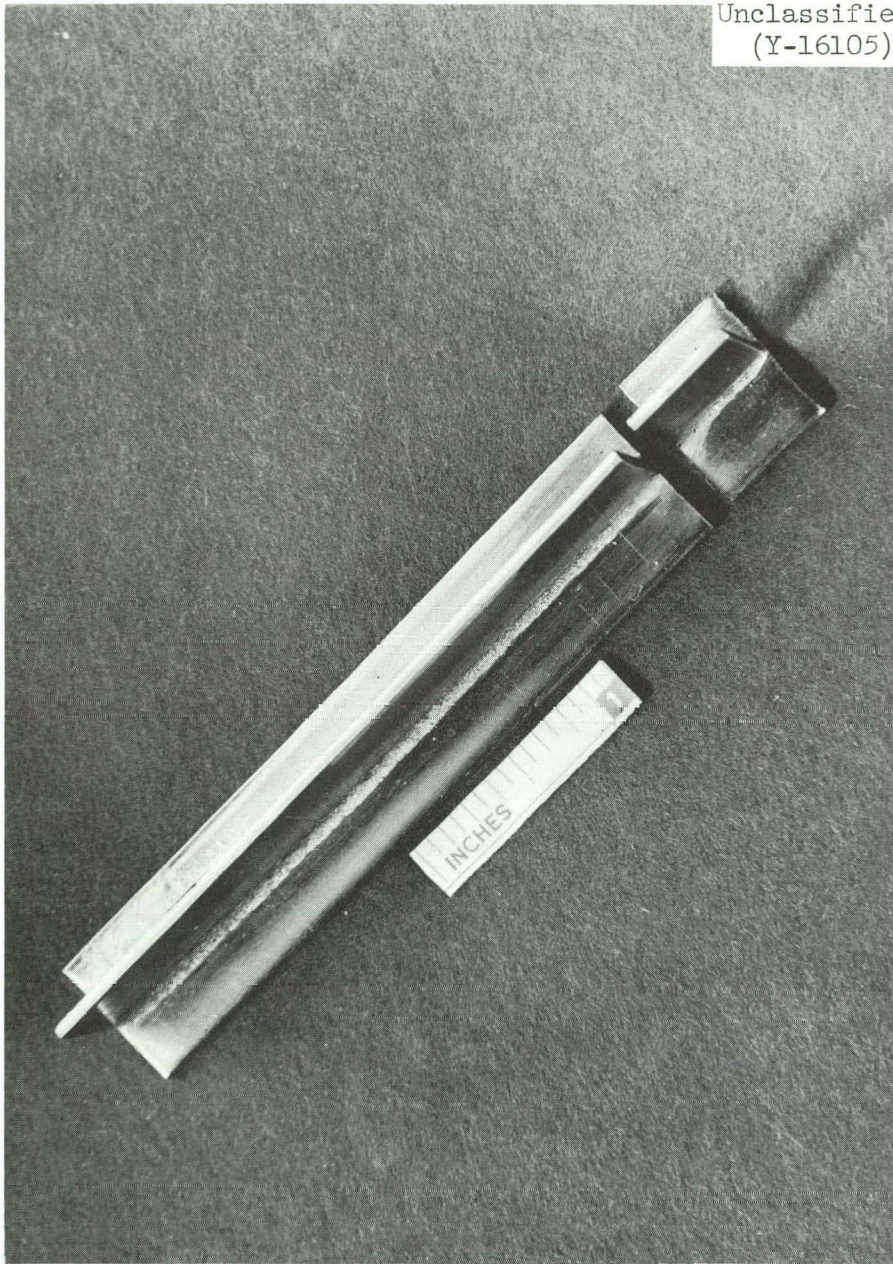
Brazed Stainless Steel Corrosion Test Specimen.
